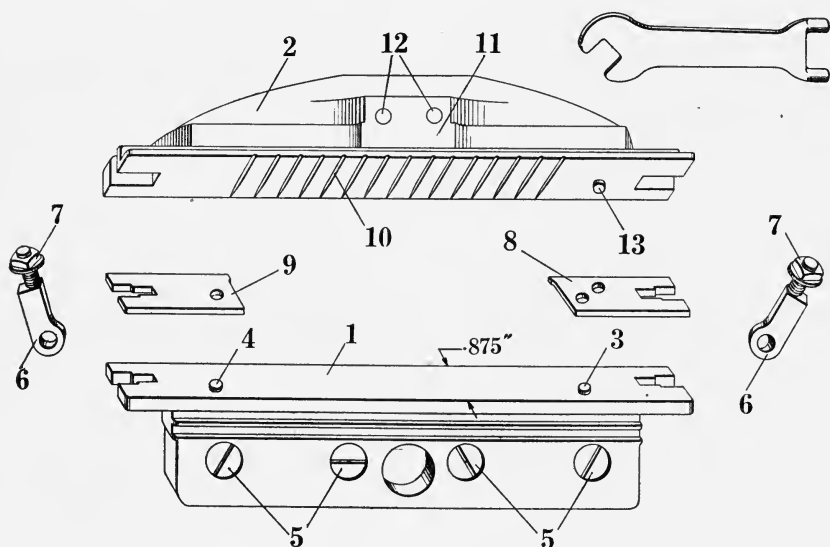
View of an Intertype Thirty-Em Universal Adjustable Mold. The body of the mold 1 is fastened to the mold disk by the four screws 5555. The cap 2, the right-hand liner 8 and the left-hand liner 9 are held to the mold body by the swivel bolts 6 and 6 by tightening the nuts 7 and 7 with a mold cap wrench at the top of the picture. The forked end of the wrench is inserted in the holes 12 of the cap to lift it from the mold. The right-hand liner 8 is always of the same length and is called the constant liner, being changed only when a thicker or thinner slug body is desired. The left-hand liner 9 can be changed for slugs of different length and thickness. The space between the ends of the liners 8 and 9 determines the length of slug to be cast. The dowel 3 in the mold body 1 accurately positions the liner 8 which has a hole in it that fits over the dowel. The dowel 4 locates the left-hand liner. The mold cap 2, by means of the dowel 13 fitting in the hole in liner 8 is positioned accurately in relation to the body 1. The mold cap 2 has grooves represented by 10 cut transversely in its under side. They are several thousandths in depth and terminate in a shallow point at the rear of the mold cap, tapering slightly throughout their length. These grooves form ribs upon the slug so that when the slug is being ejected through the trimming knives, it may be trimmed by the right-hand knife, shaving the ribs to accurate body size. The boss, indicated at 11 on the cap 2, banks against a block mounted upon the right trimming knife as the mold comes forward for ejection. This boss 11 banking against the pad on the knife takes the thrust for the mold cap when the ejector blade pushes the slug from the mold.
